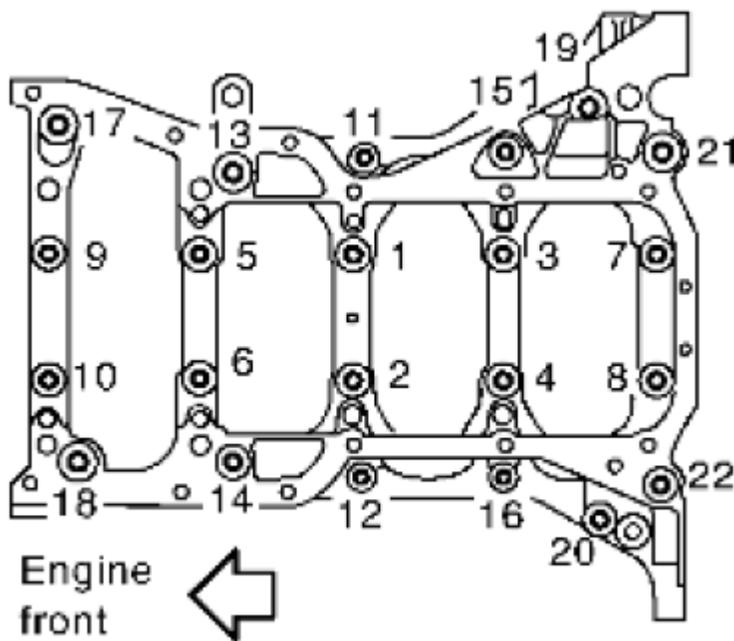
Tightening Order Of Lower Cylinder Block Bolts
